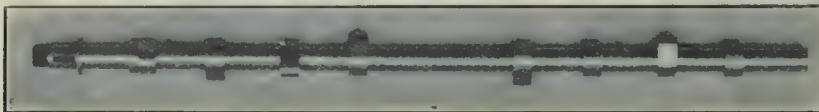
A Solid Crankshaft Ground in the Cam Shaft Grinder
